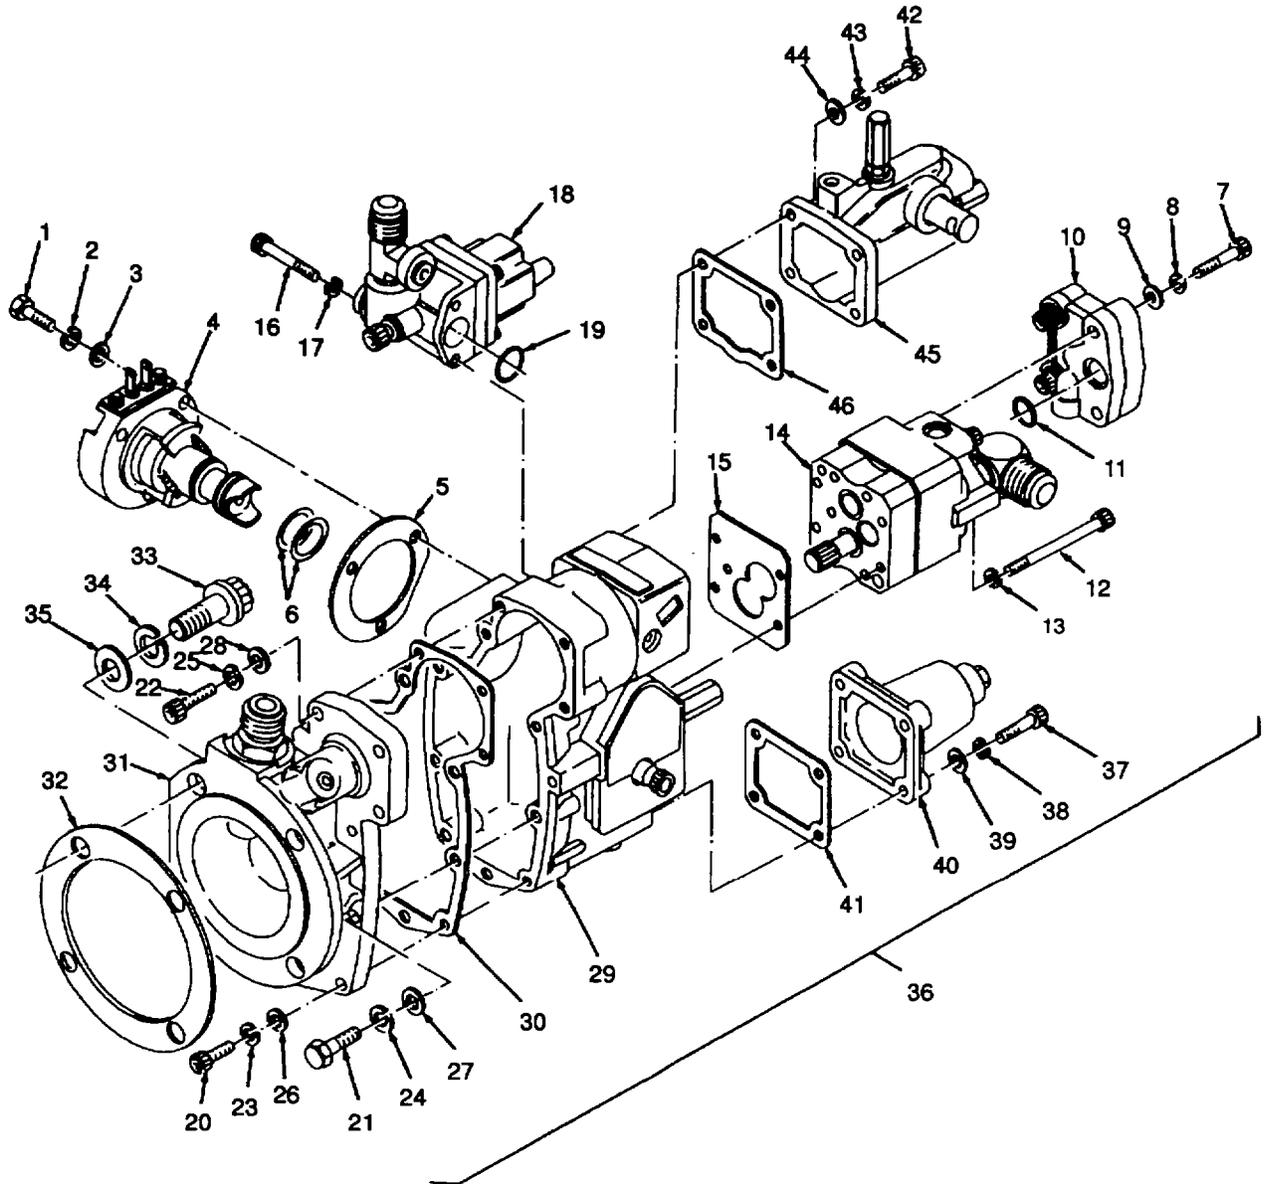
Fuel Injection Pump Subassemblies, Exploded View (Sheet 1 of 2)
